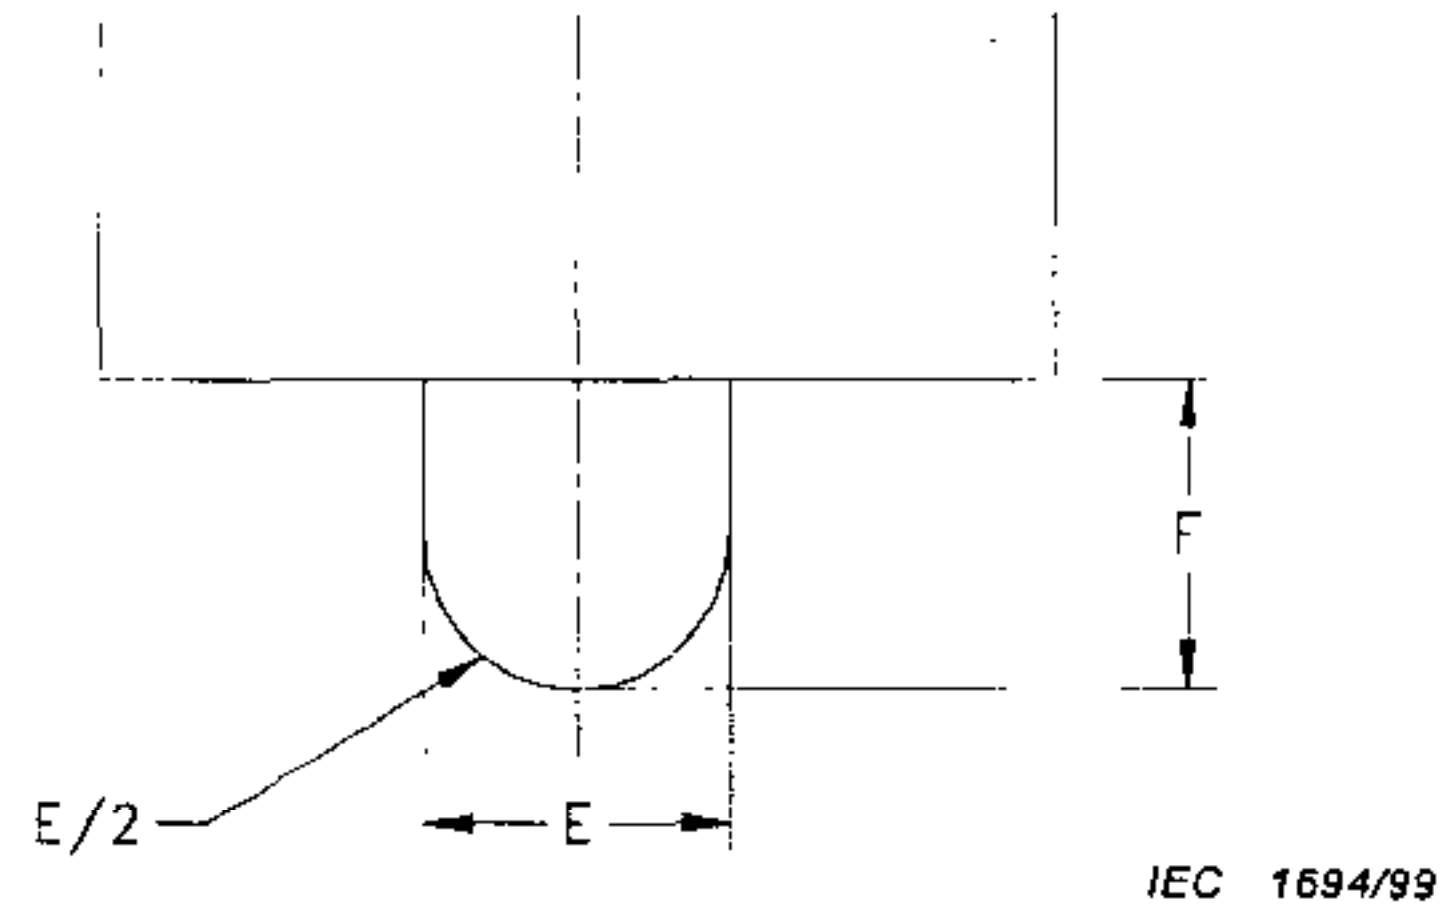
Test cap for the test of clause 13 for lampholders Fa6
